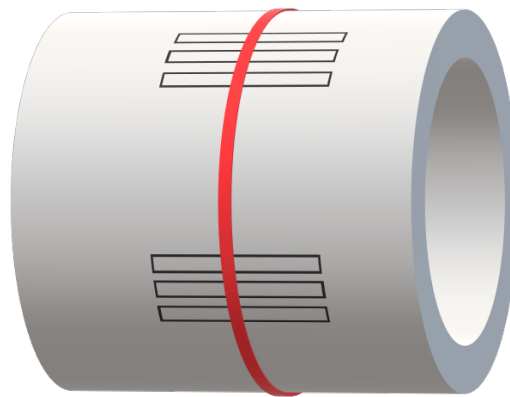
An overview of how the samples were machined from the pipe material. The girth weld is shown as a red band, outlines of samples are shown as black rectangles.
